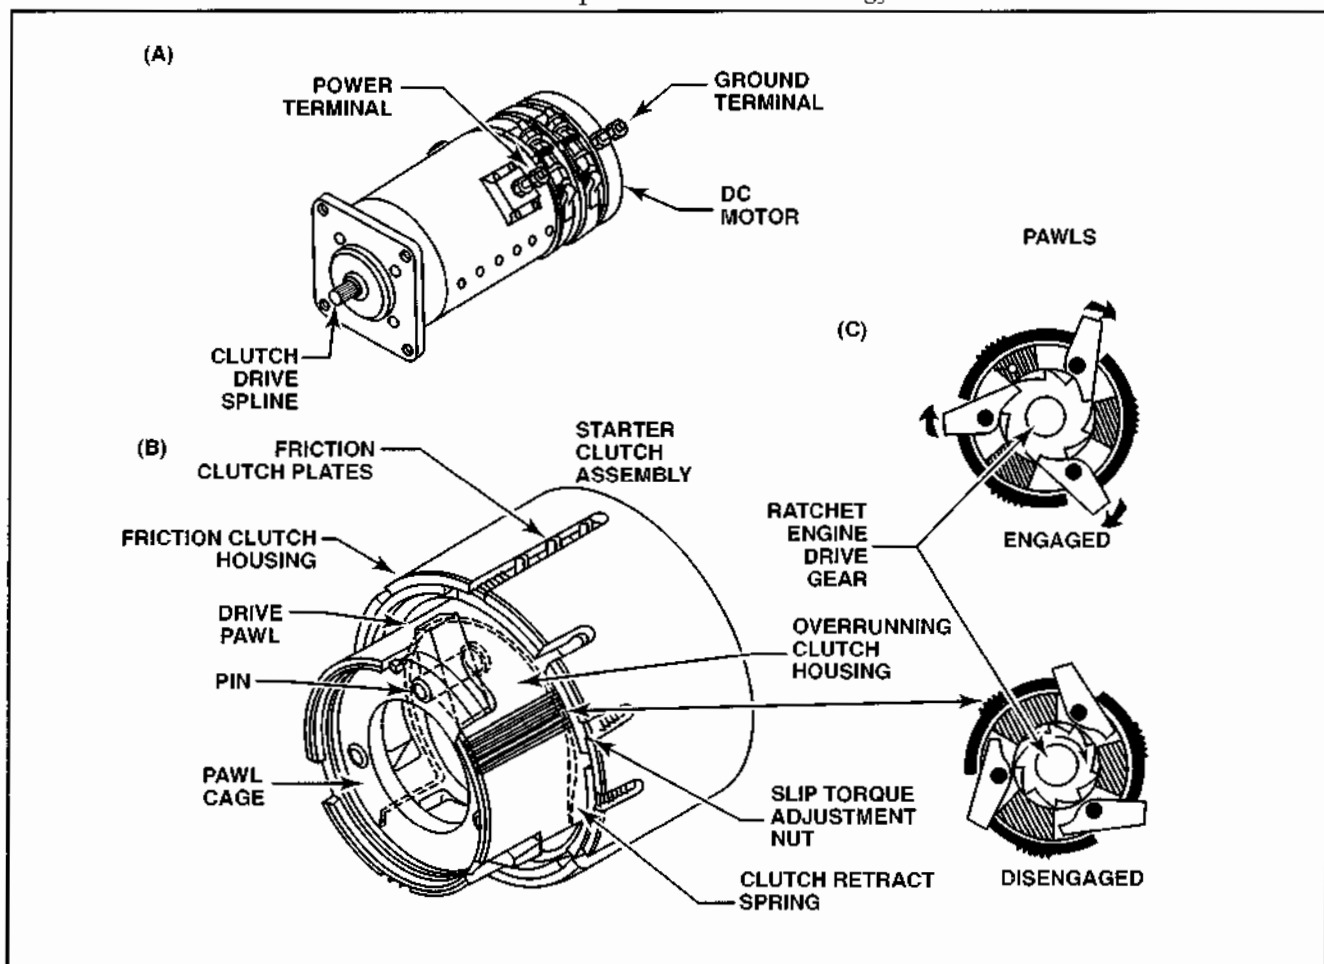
(A) The motors in typical direct-cranking starter for a turbine engine are similar to those used in reciprocating engines. (B) The typical direct-cranking starter for a turbine engine incorporates a clutch assembly. (C) When the starter drive is engaged, pawls in the clutch assembly turn the drive gear and rotate the engine. When the engine starts, the acceleration of the engine drive gear causes disengages the pawls.
